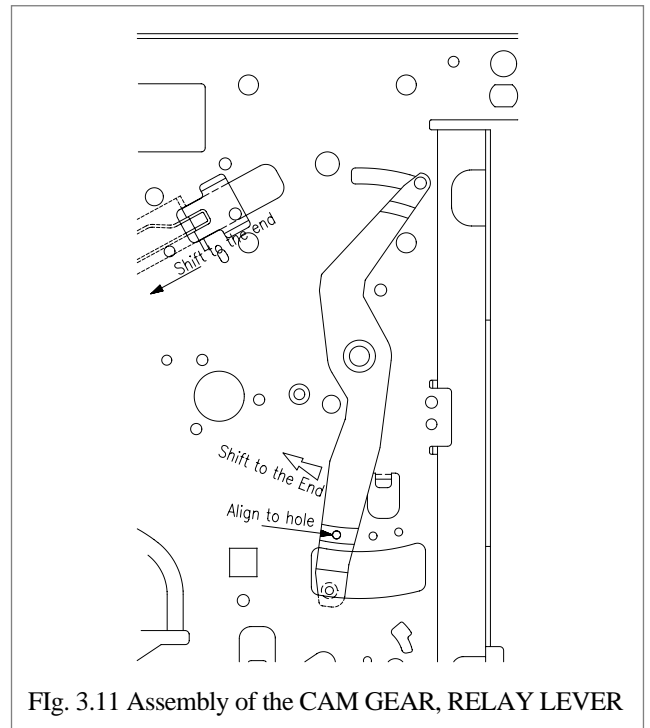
Assembly of the CAM GEAR, RELAY LEVER
